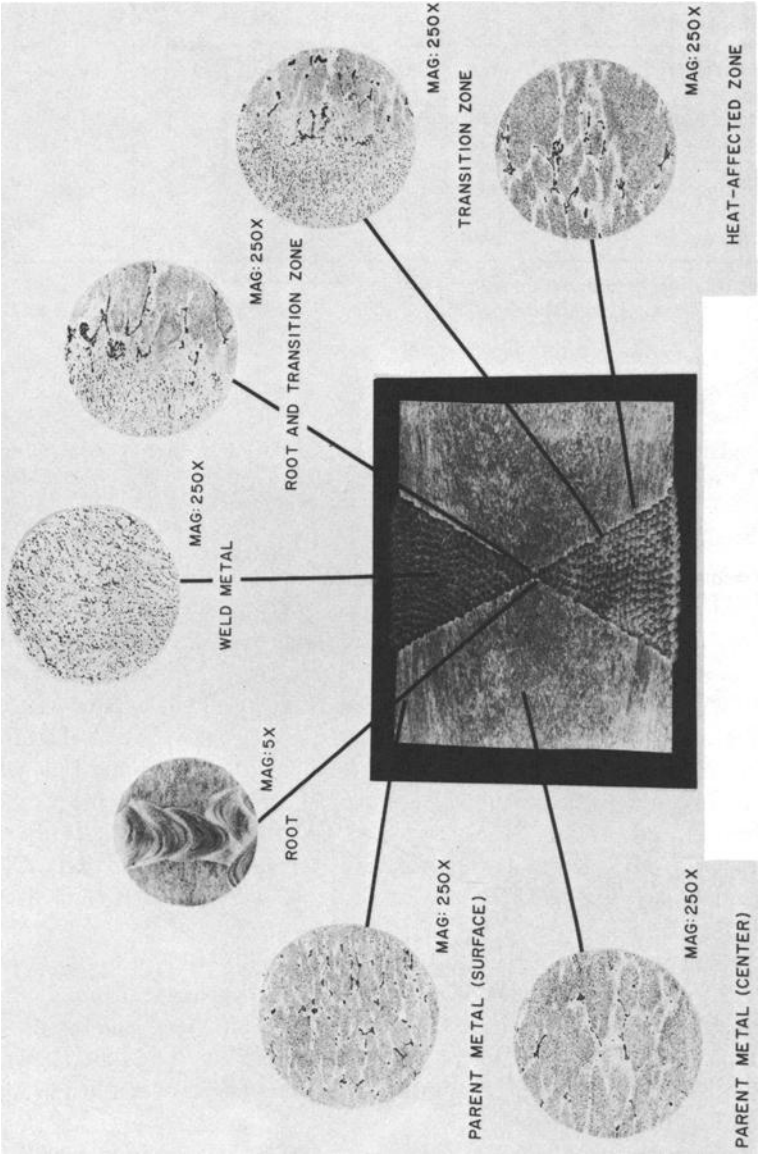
Metallographic examination of groove weld in 7.7-in.-thick 5083-0 plate made with 5183 filler metal with the gas-metal arc (MIG) method (reduced one third for reproduction).
